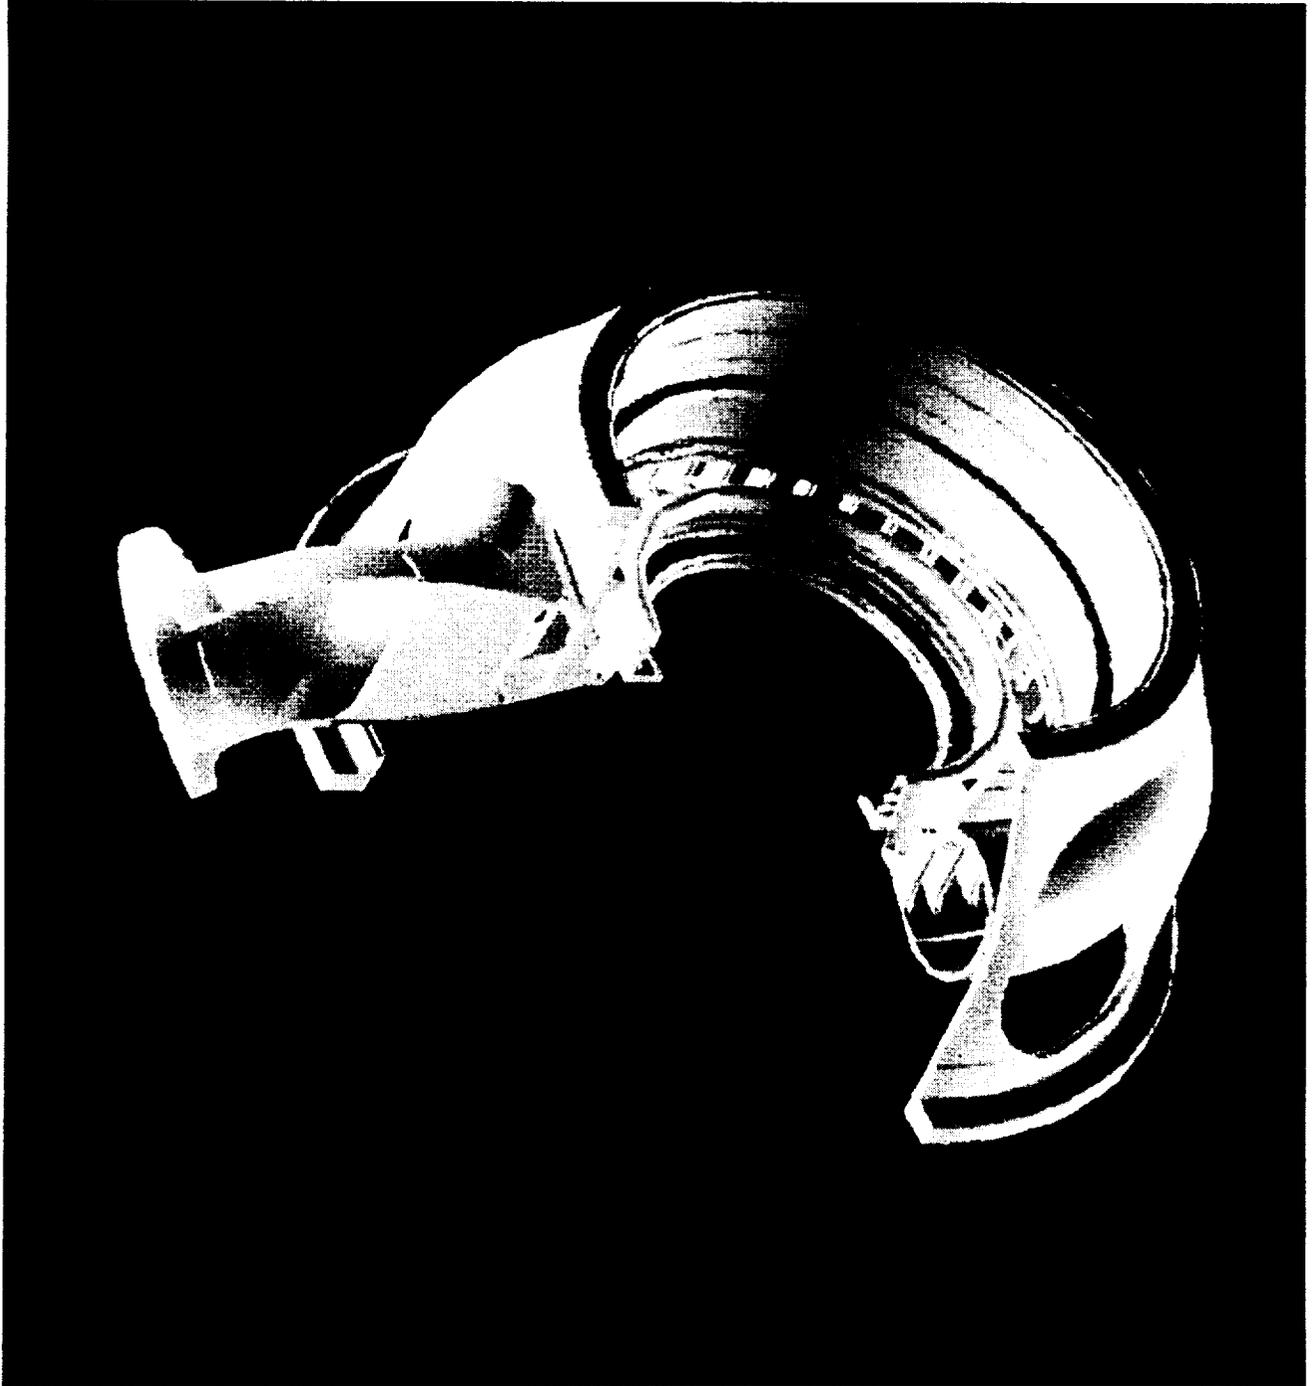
CAD Cutaway View Of Turbine Manifold
